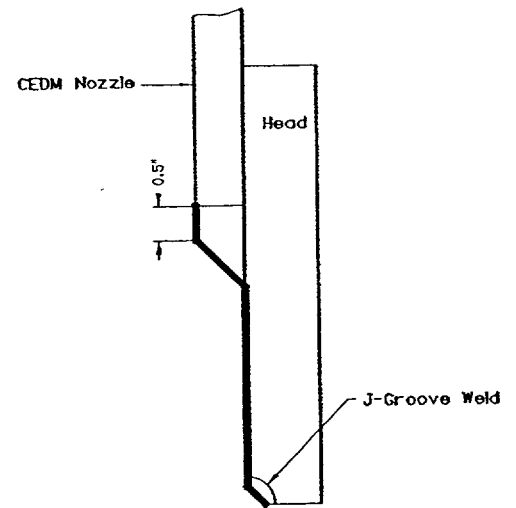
AUTOMATIC OR MACHINE (GTAW) TEMPER BEAD WELDING
